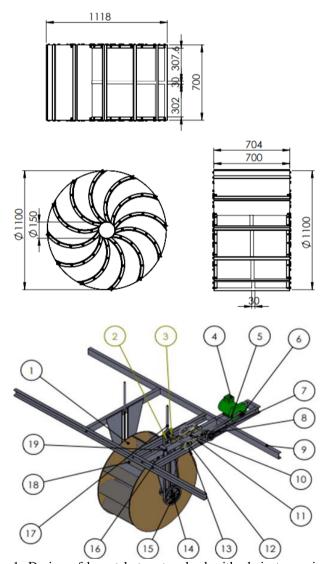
Design of breastshot waterwheel with chain transmission mechanism to drive an electric generator: (1) blade holder plate; (2) fan belt B115; (3) pulley 6 inch; (4) generator asynschronous; (5) fan belt B77; (6) pulley 3 inch; (7) pulley 8 inch; (8) pillow block; (9) UNP; (10) shaft; (11) sprocket Z16; (12) gear transmission; (13) sprocket Z40; (14) pulley 16 inch; (15) shaft 50 mm; (16) arm; (17) thread mechanism; (18) blade.
